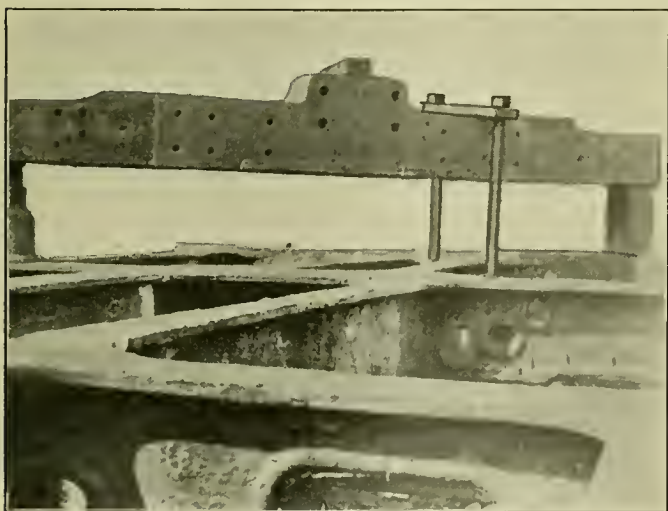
Use of Cast Steel Bumper as Jacking Beam
